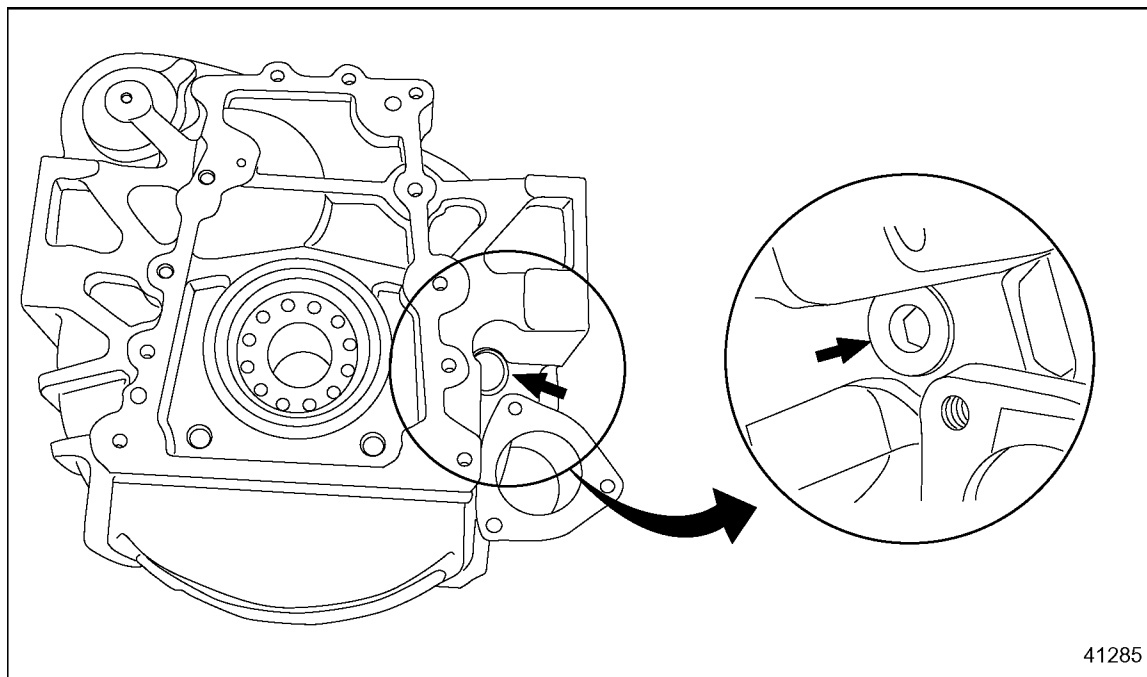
Installation of Pipe Plug Above Cranking Motor Mount
